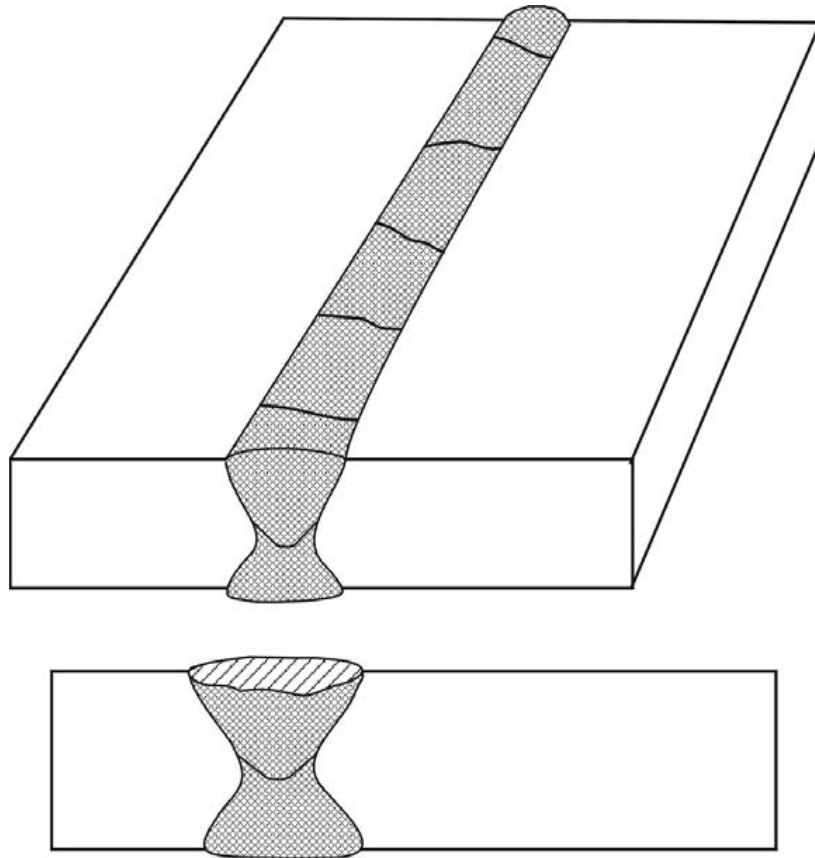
Schematic showing SCC damage on hard weld pass not tempered by subsequent weld passes [8].
